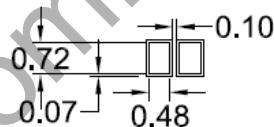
PCB Landing Pattern of the FIPS 140-2 Module Without Antenna
